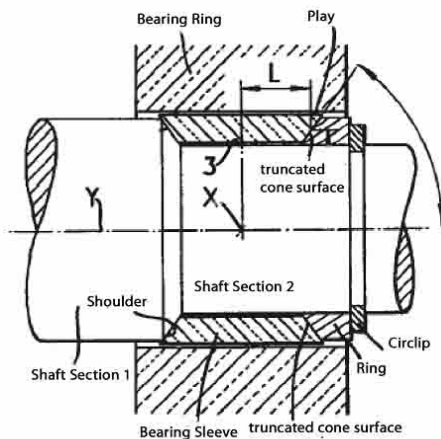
Representation of the bearing sleeve [6], strutted axially between two cone surfaces
